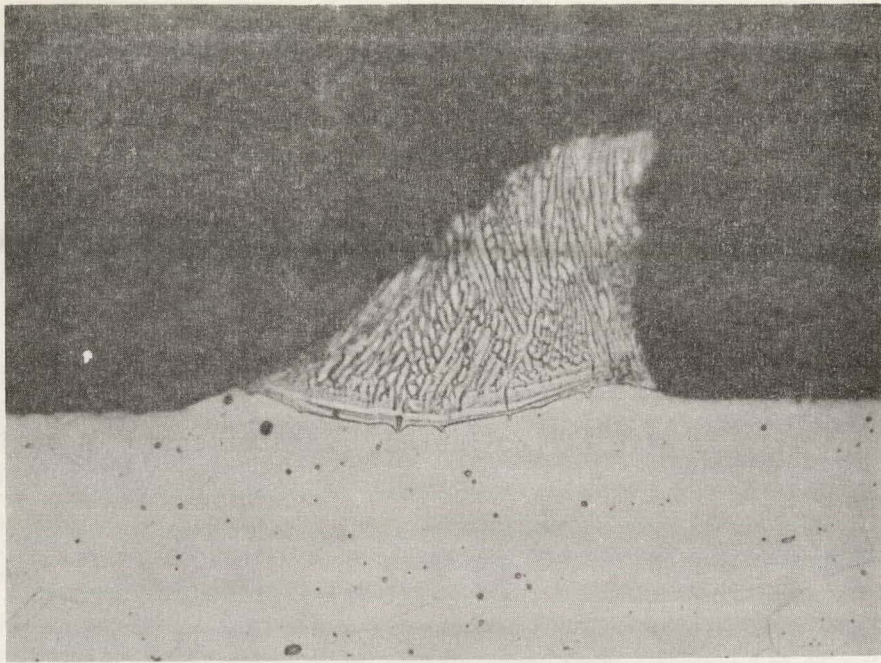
Transverse section of tube wall and weld after thermocouple sheath has been pulled away.
